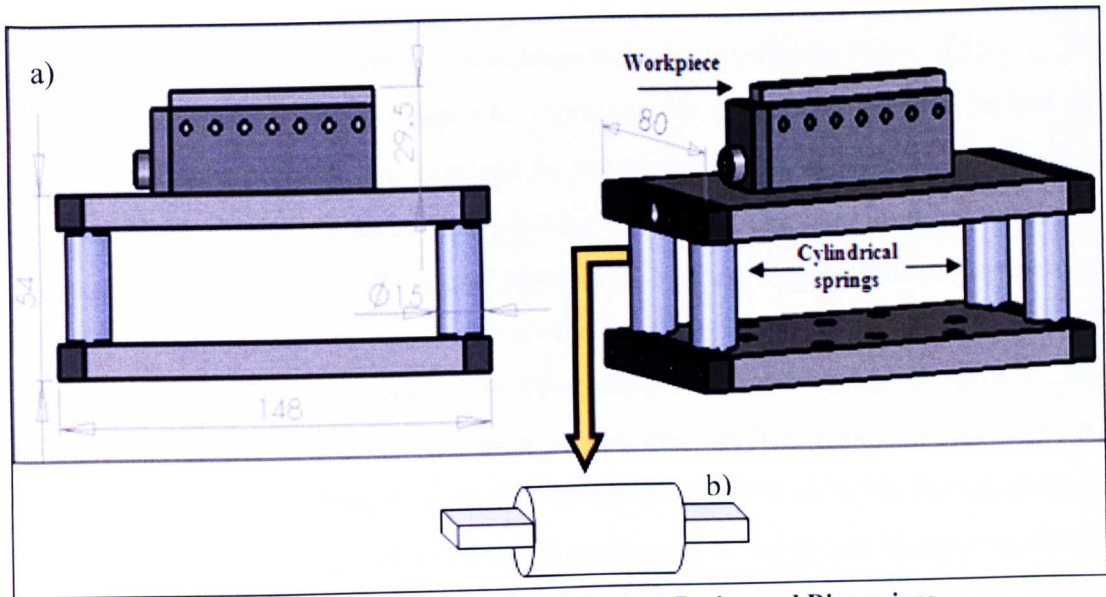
2: Table with Cylindrical Springs-Design and Dimensions.
